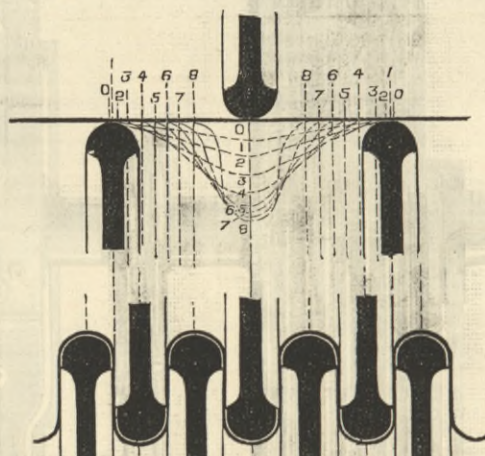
ROLLING MILL FOR CORRUGATED SHEET
